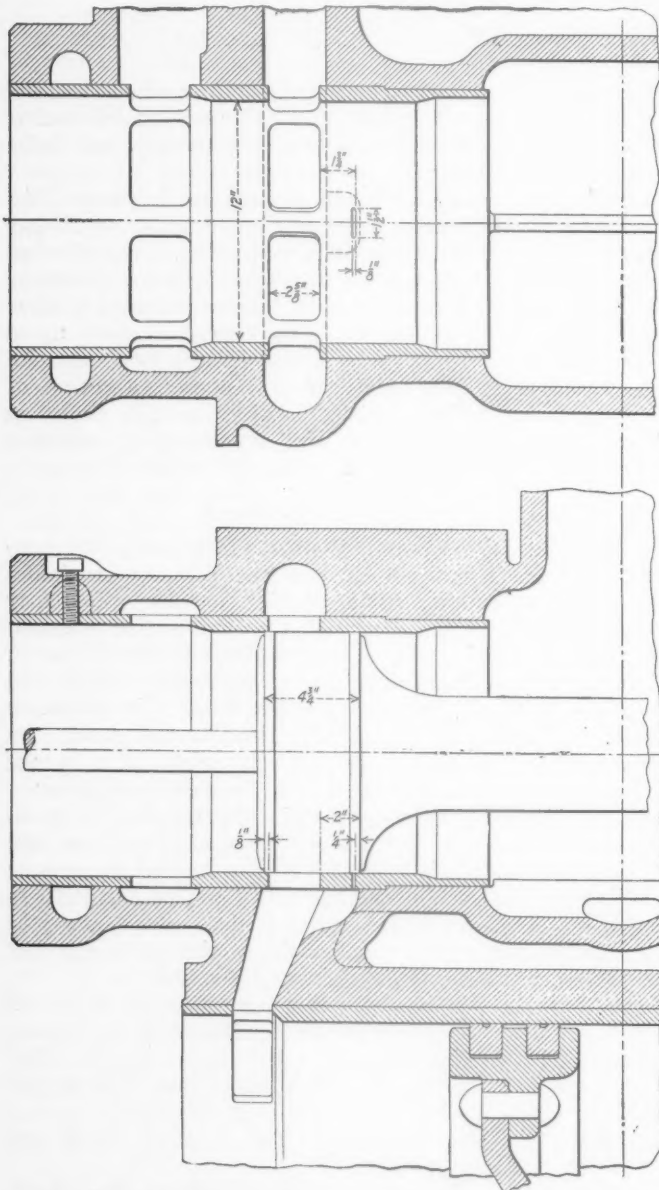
Location of the Auxiliary Port in the Valve Bushing
